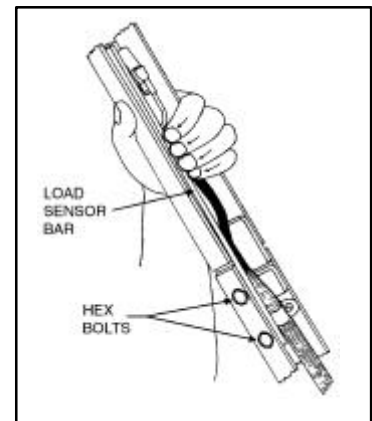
LOAD SENSOR ADJUSTMENT
